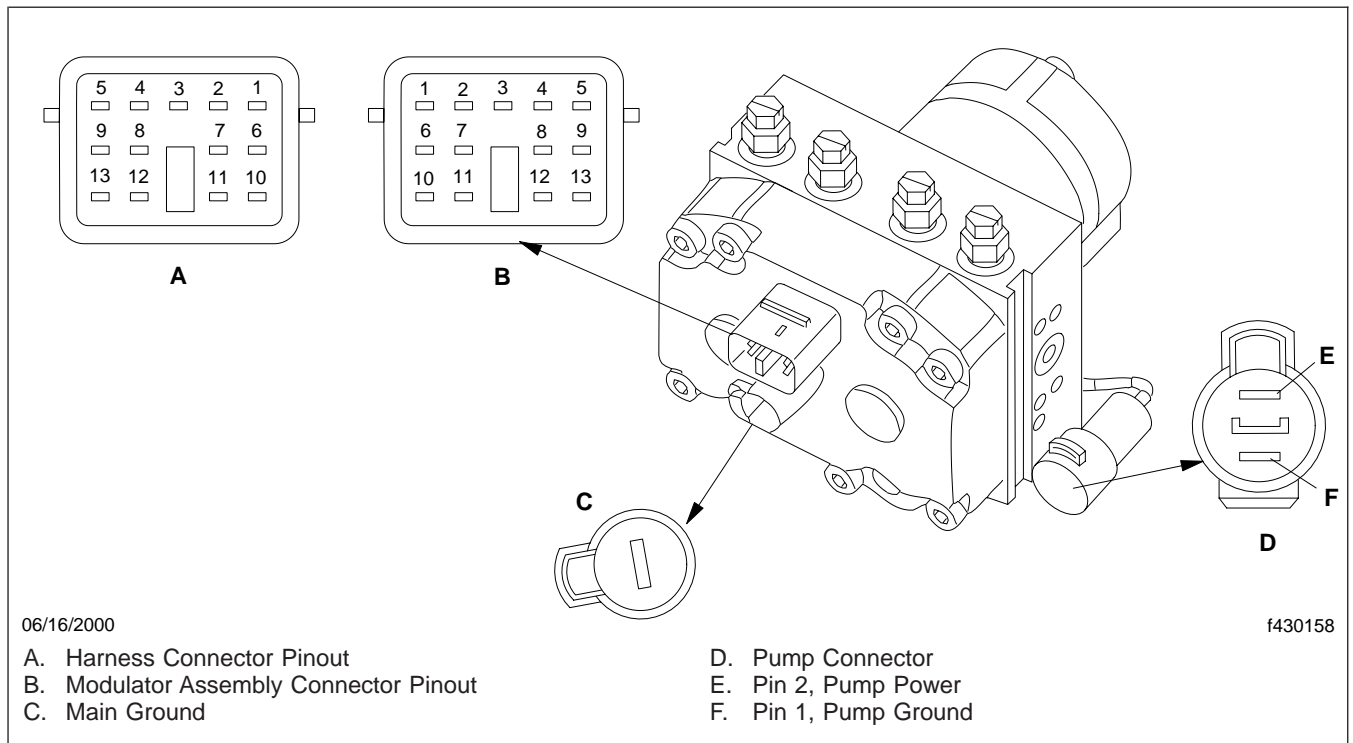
, ABS Modulator Assembly Pin Connectors, D Version
